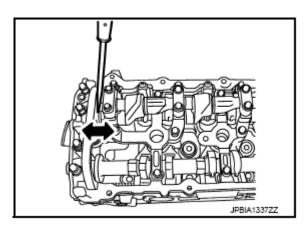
Measuring Drive Shaft End Play Courtesy of NISSAN MOTOR CO., U.S.A.
